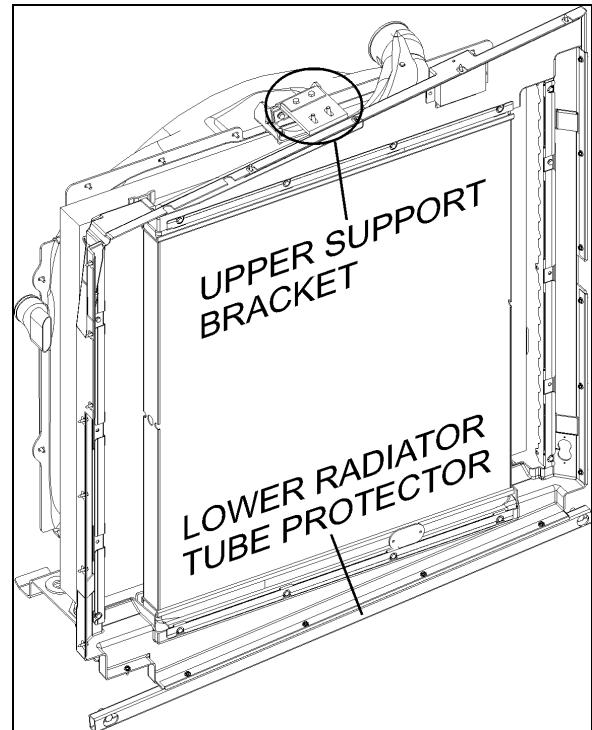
UPPER SUPPORT BRACKET & TUBE PROTECTOR
